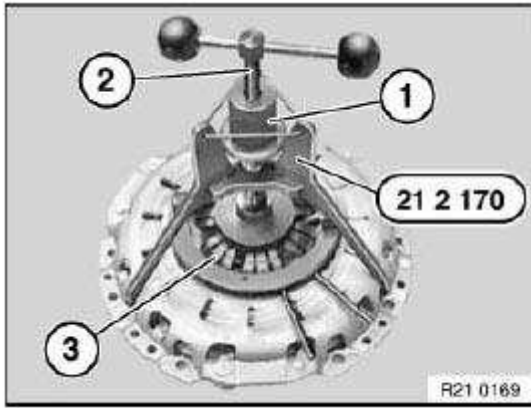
Special Tool 21 2 170, Spindle And Diaphragm Spring
